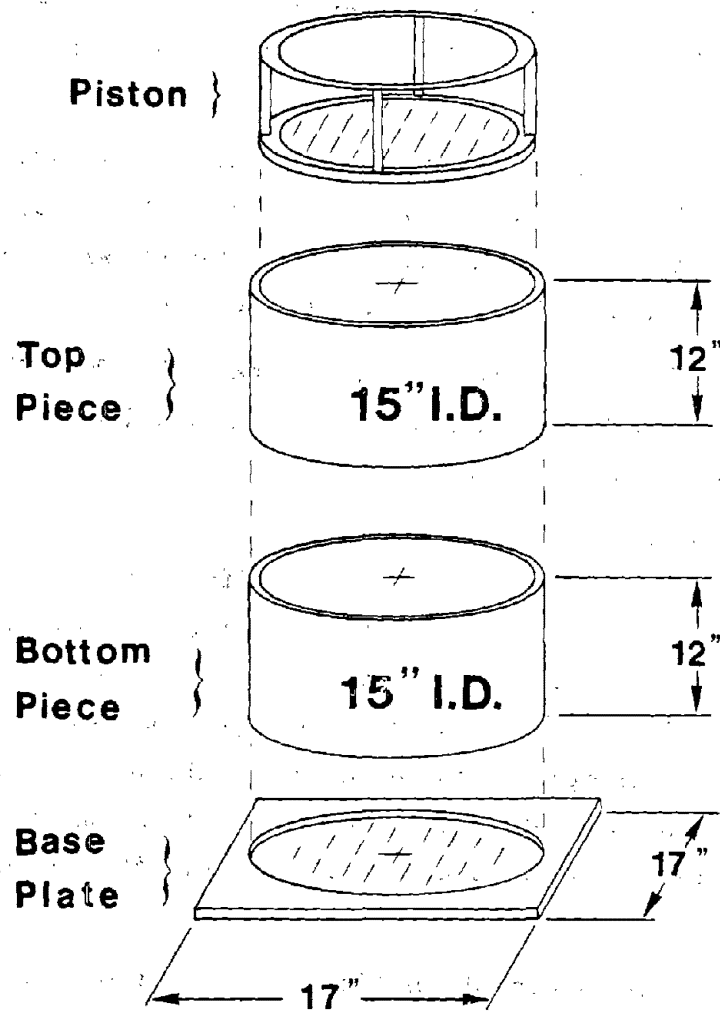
Exploded view of soil container (1 in. = 2.54 cm).
